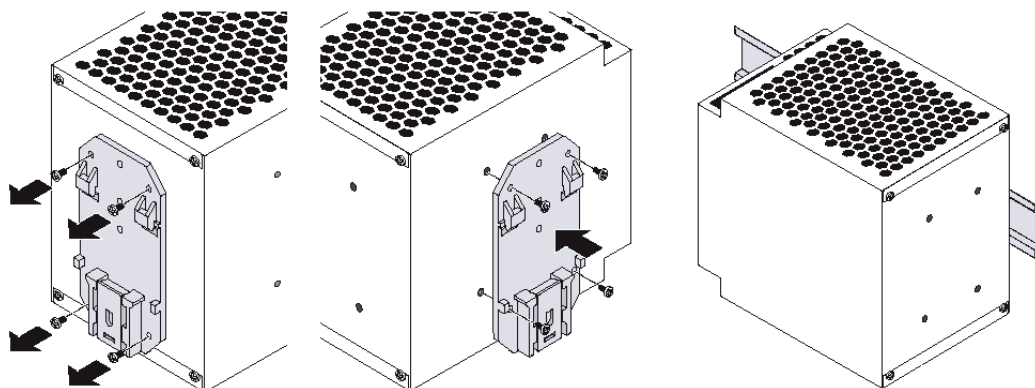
Flat mounting position with UTA 107 universal DIN rail adapter
